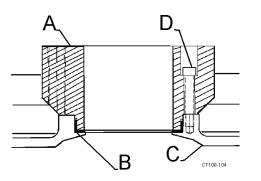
Insert L-gasket and Fasten Adapter in Place
